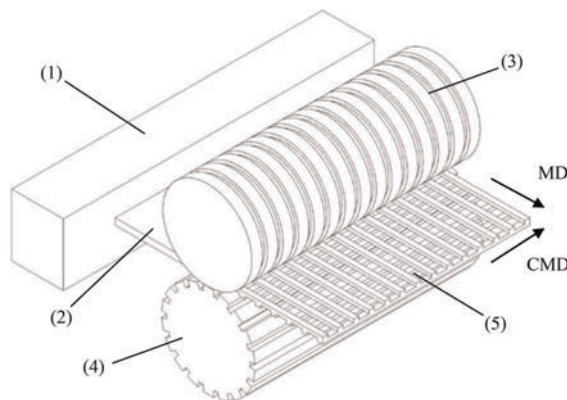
Manufacturing of a geosynthetic drainage sheet (GDS). (1) Extruder; (2) Plate-shaped base body; (3) Embossing roller 1; (4) Embossing Roller 2; (5) GDS.
